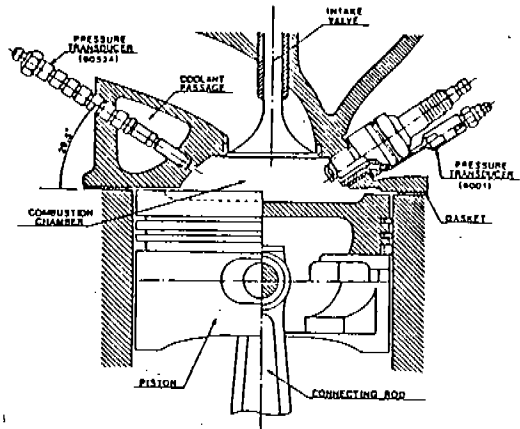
Schematic of combustion chamber equipped with two pressure transducers
